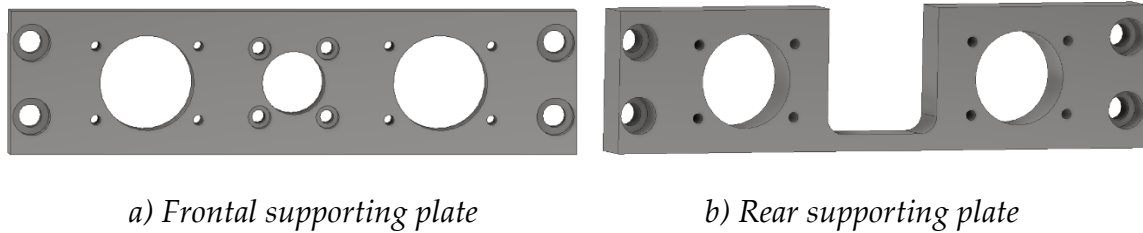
Renders of the frontal and rear linear bearings supporting plates.
